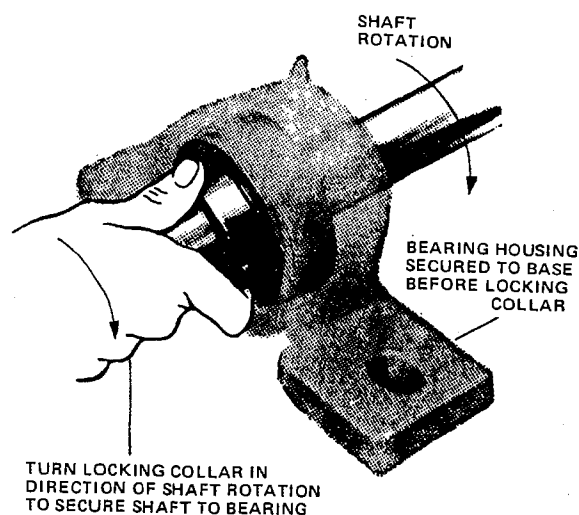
ECCENTRIC CAM LOCKING COLLAR BEARING INSTALLATION
